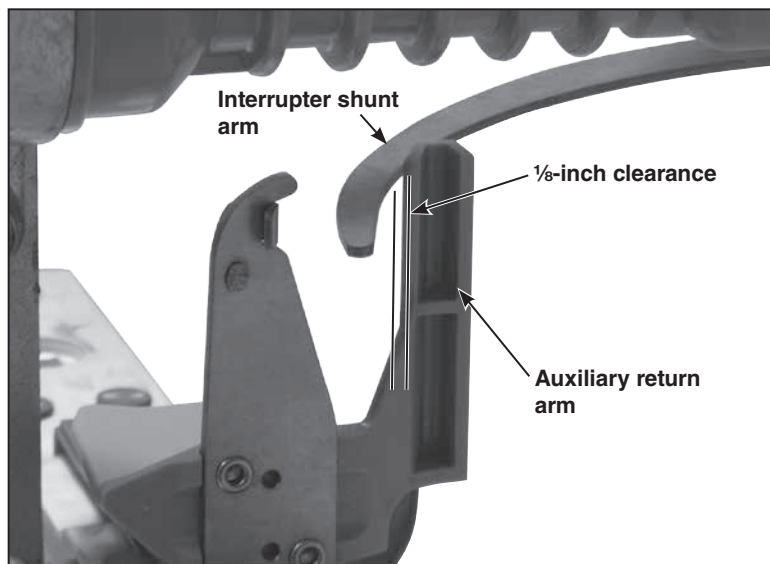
Check for 1/8-inch clearance between the interrupter shunt arm and the auxiliary return arm.
